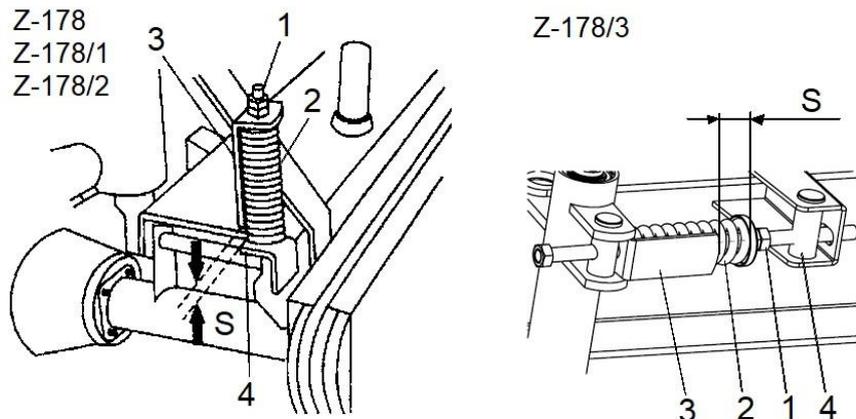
V-belt tensioner: 1 - adjustment nuts, 2 - tightener spring, 3 - tightener indicator bar, 4 - tightener bracket, S (dimension) = 0.5-3 mm.
